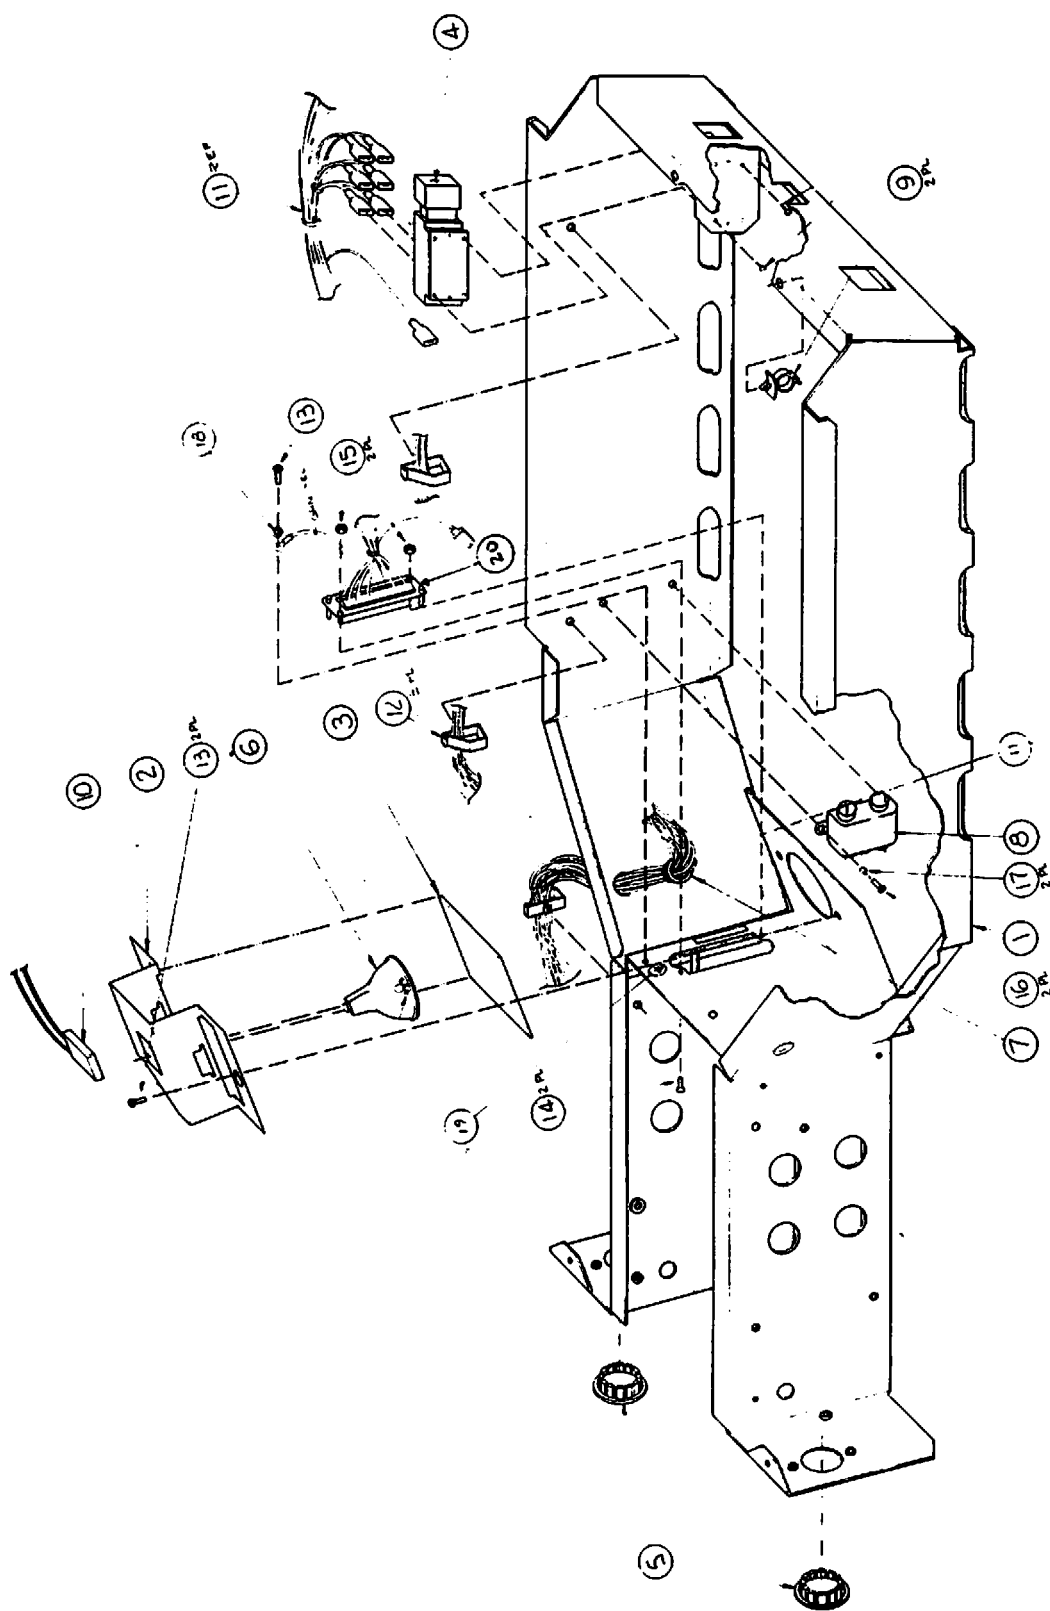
WARMER MODULE SUBASSEMBLY, PARTS LOCATION DIAGRAM
